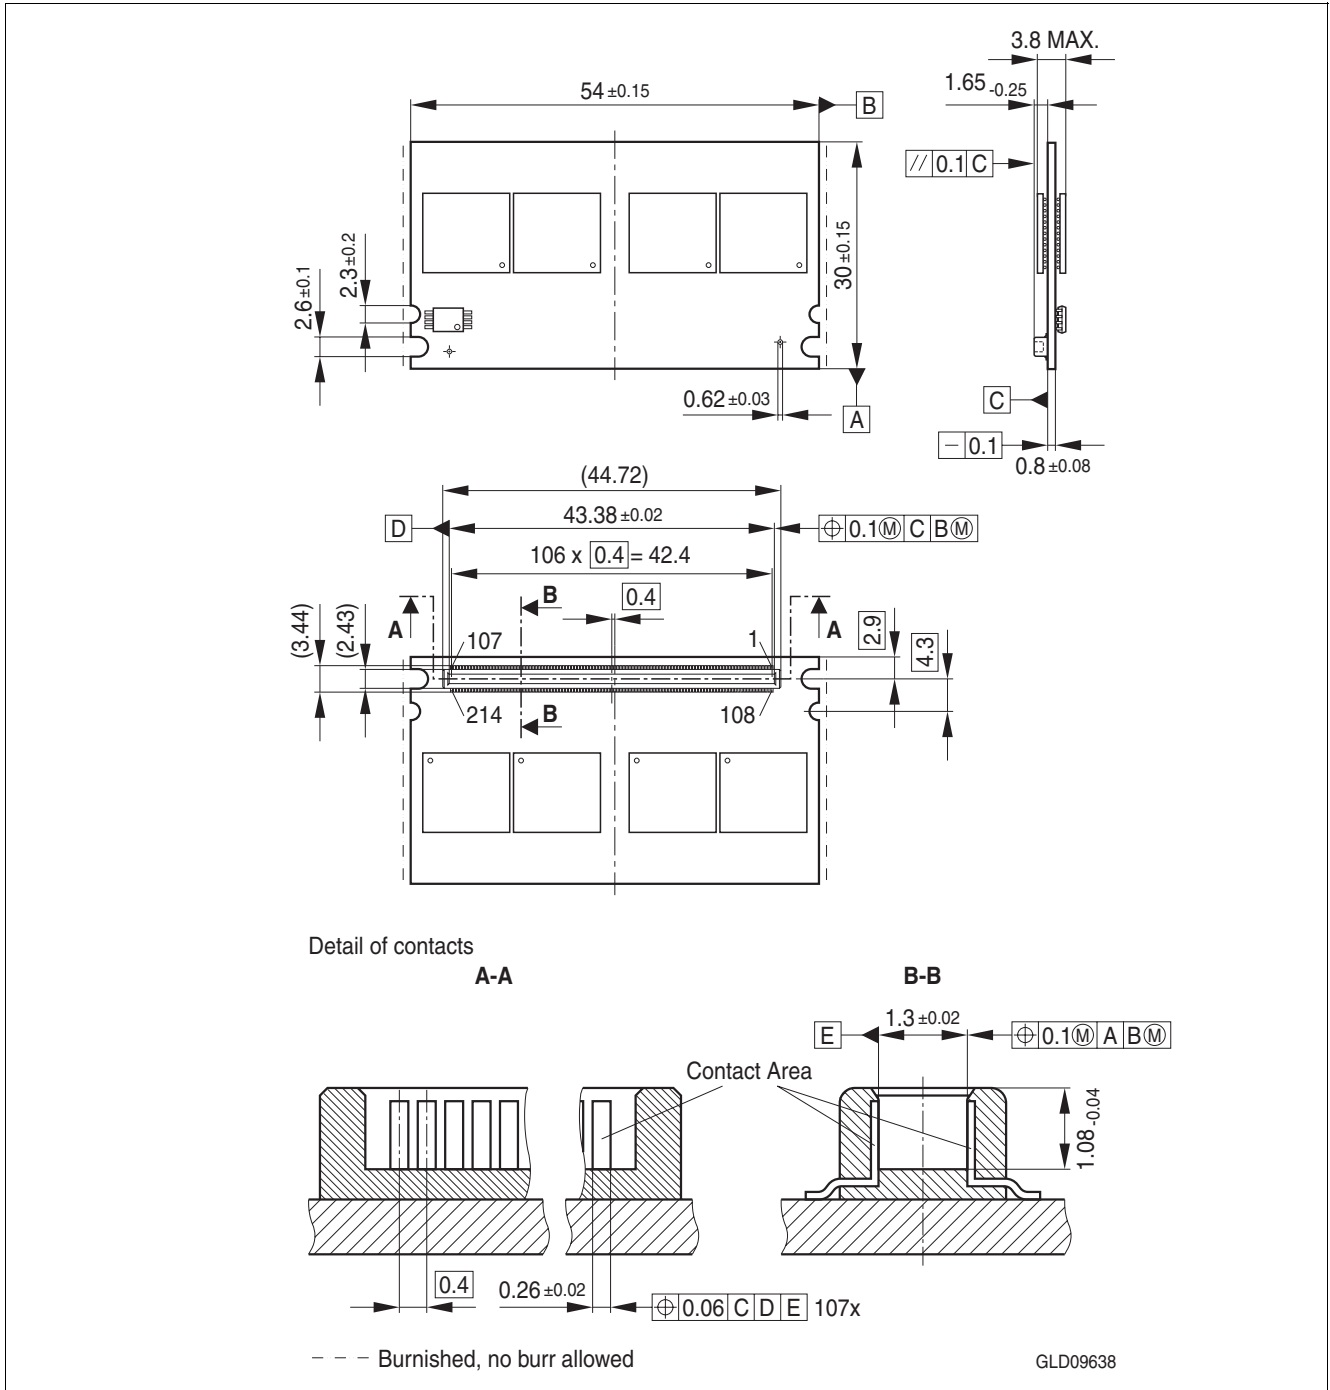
PCB Raw Card A Component Placement L-DIM-214-1
